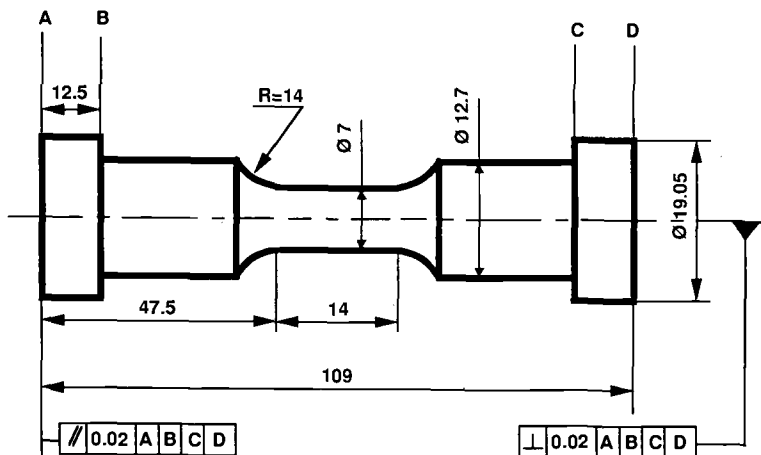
Uniaxial fatigue specimen (all dimensions in mm).
